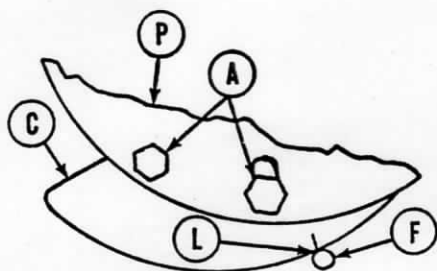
Schematic view of speed control mechanism. Johnson and Evinrude 1967 models have two marks as shown in Fig. OM6-5.
